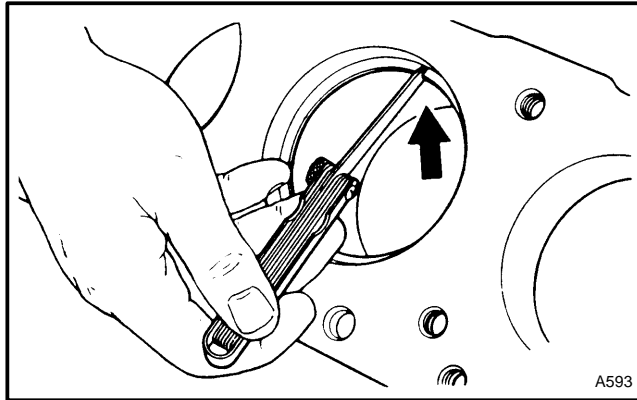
CHECK THE END CLEARANCE OF THE PISTON RINGS
